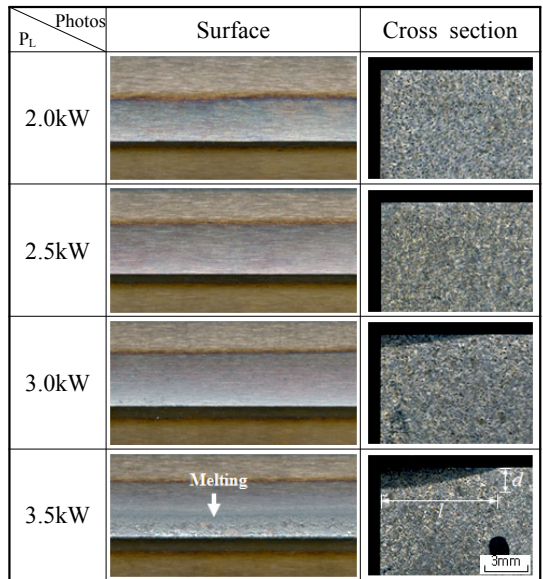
Surface and cross section of hardened specimen at v=10 mm/sec
